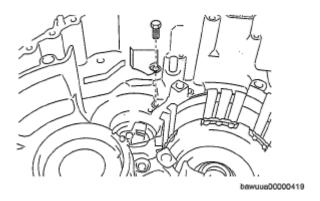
Compressing Seal Rings Courtesy of MAZDA MOTORS CORP.
